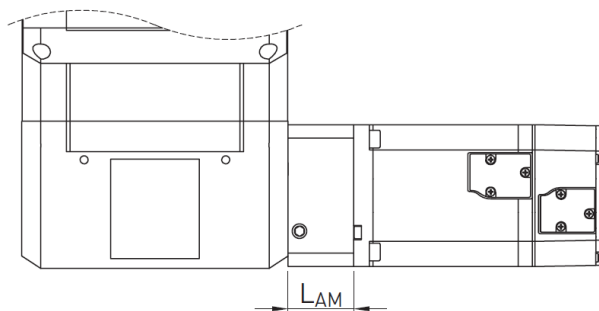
Motor connection of linear module HM-B without gearbox
